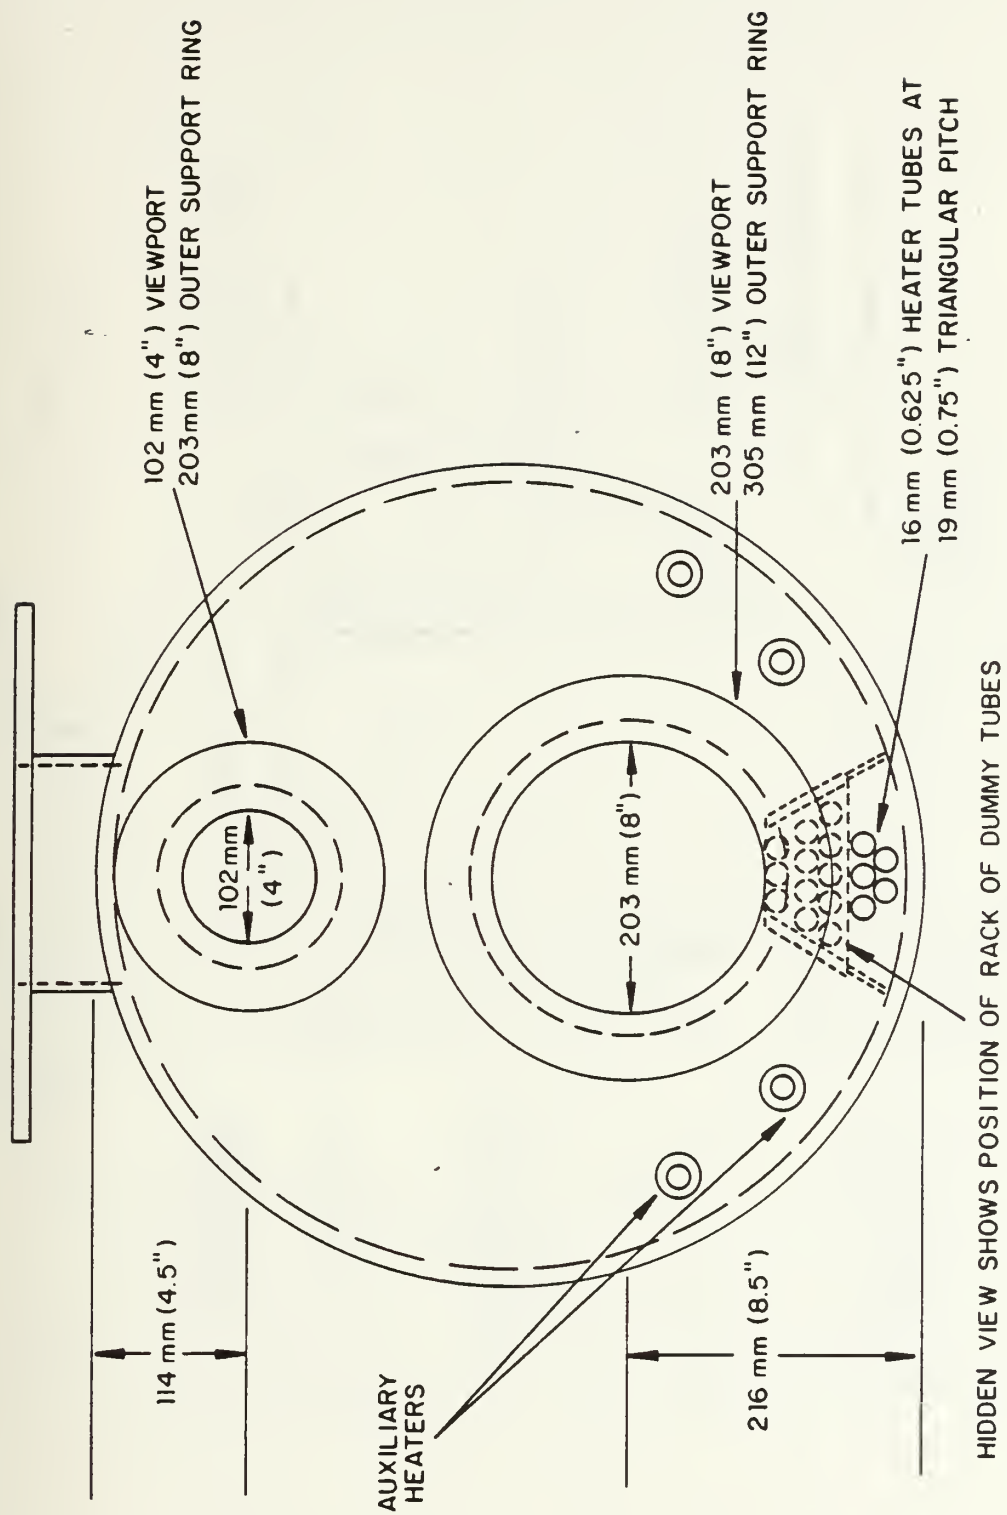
Front View of Multi-Tube Apparatus Evaporator
